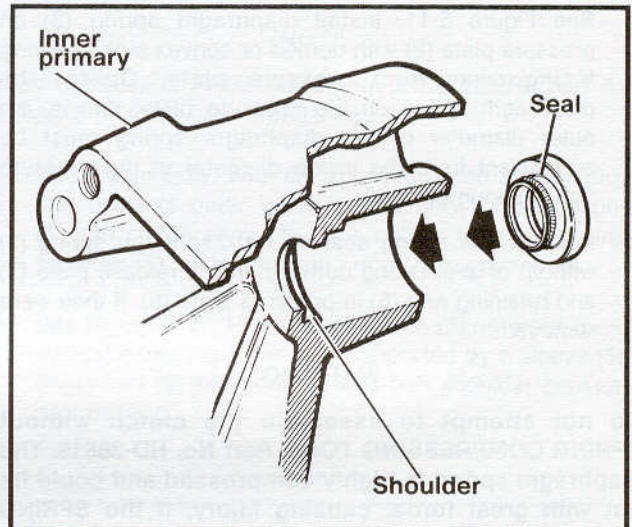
Primary Chaincase Jackshaft Oil Seal
